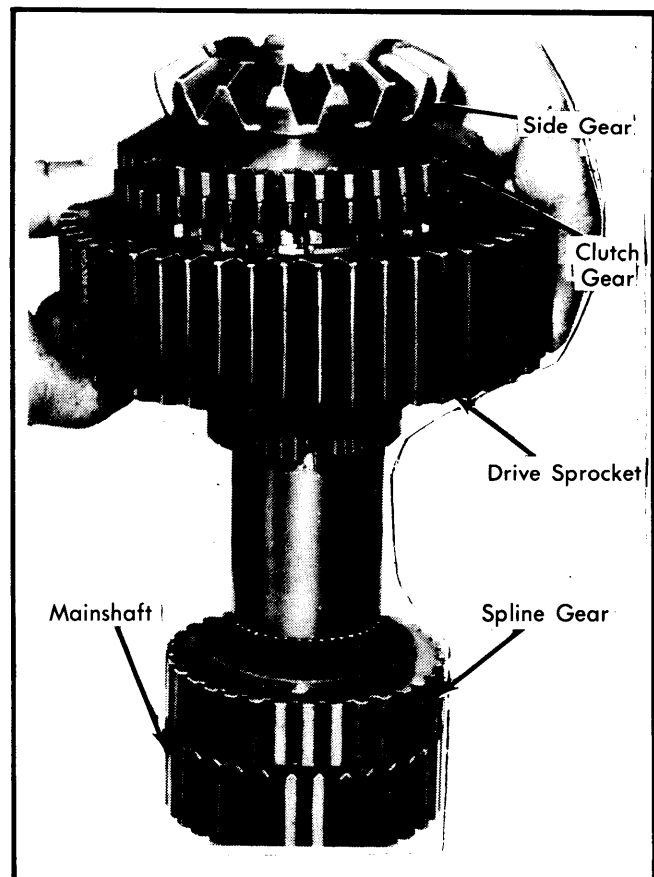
Removing Drive Sprocket, Clutch Gear, Side Gear and Sprocket Carrier from Mainshaft
